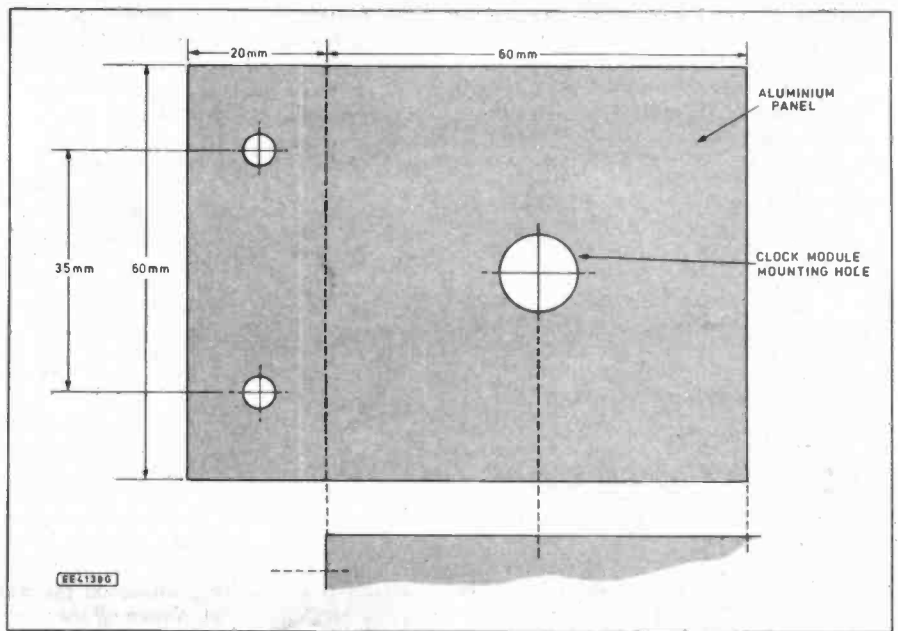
Drilling details and dimensions for the clock mounting bracket.
